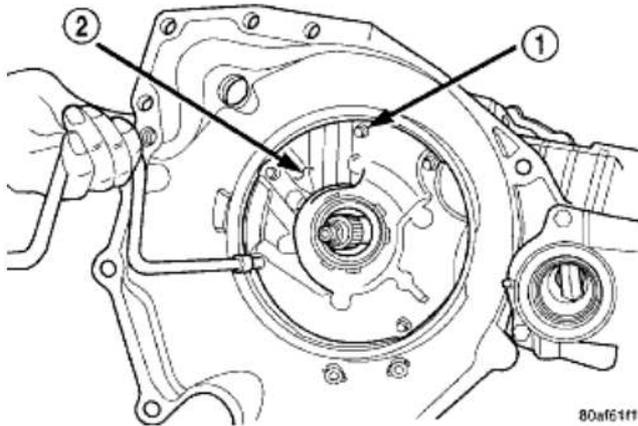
Removing/Installing Oil Pump-To-Case Bolts
